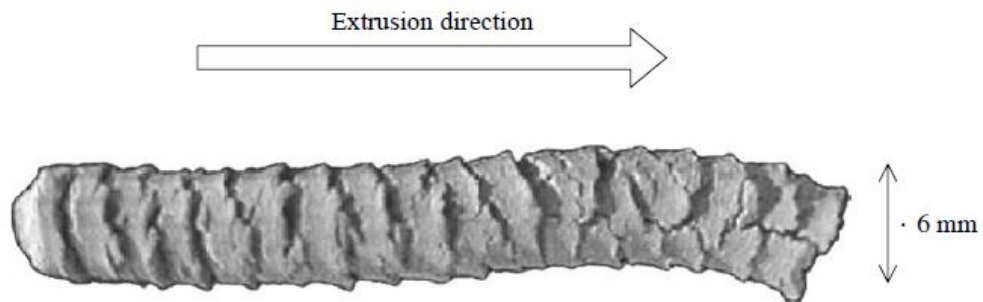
Surface fracture in an alumina based paste extrudate [12]
